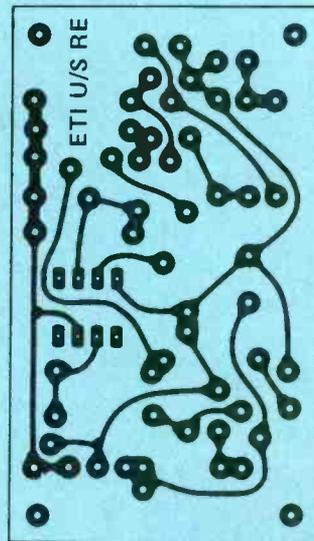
Printed circuit board of receiver. Full size 70 x 40mm.
